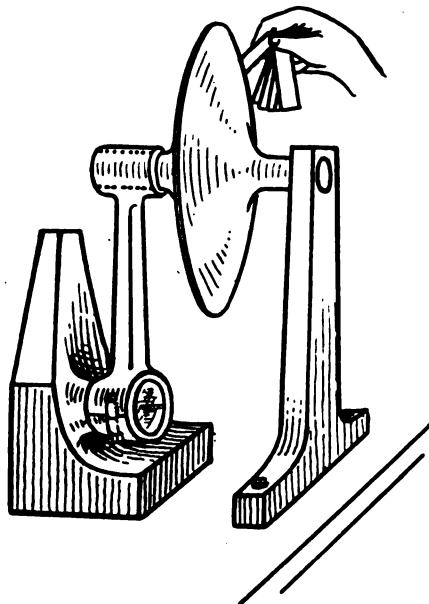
A JIG ON WHICH THE CONNECTING ROD CAN BE ACCURATELY CHECKED UP
